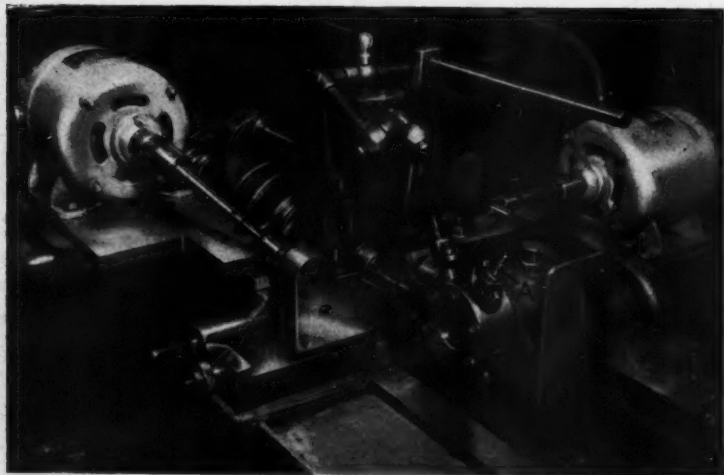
At this set-up on a C.V.A. No. 8, single-spindle automatic, slots are milled in opposite sides of a brass tube which is then compressed axially, by the tool A, to form the spacer shown in Fig. 1
